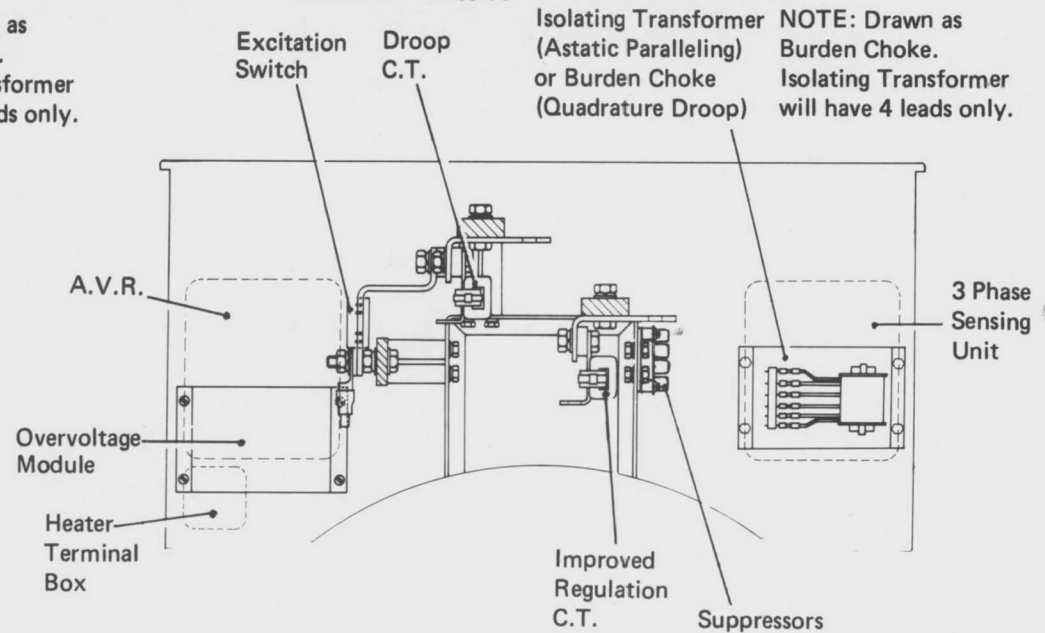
Frames 6 and 7 Accessory Location Drawings
